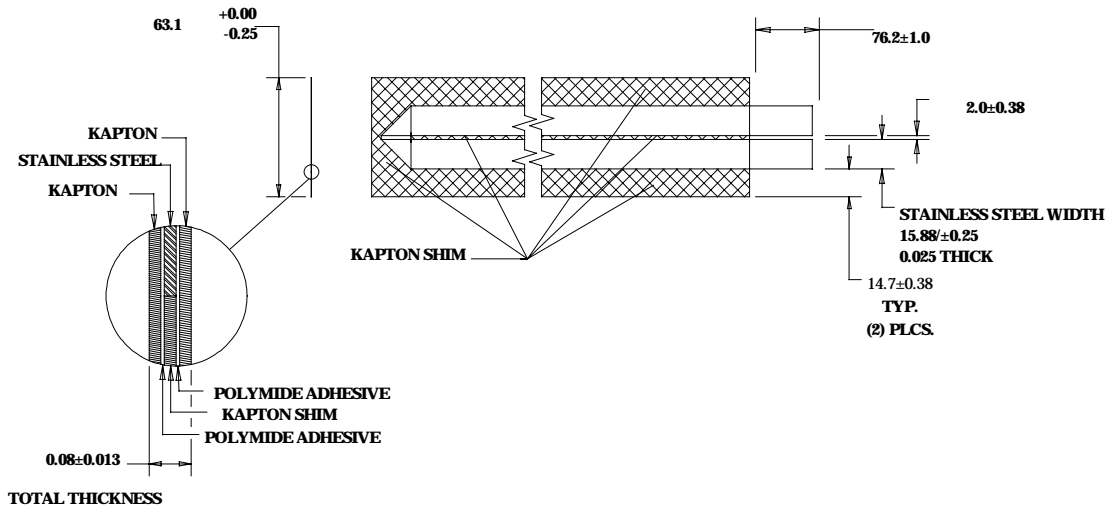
Interlayer quench protection heater assembly.
